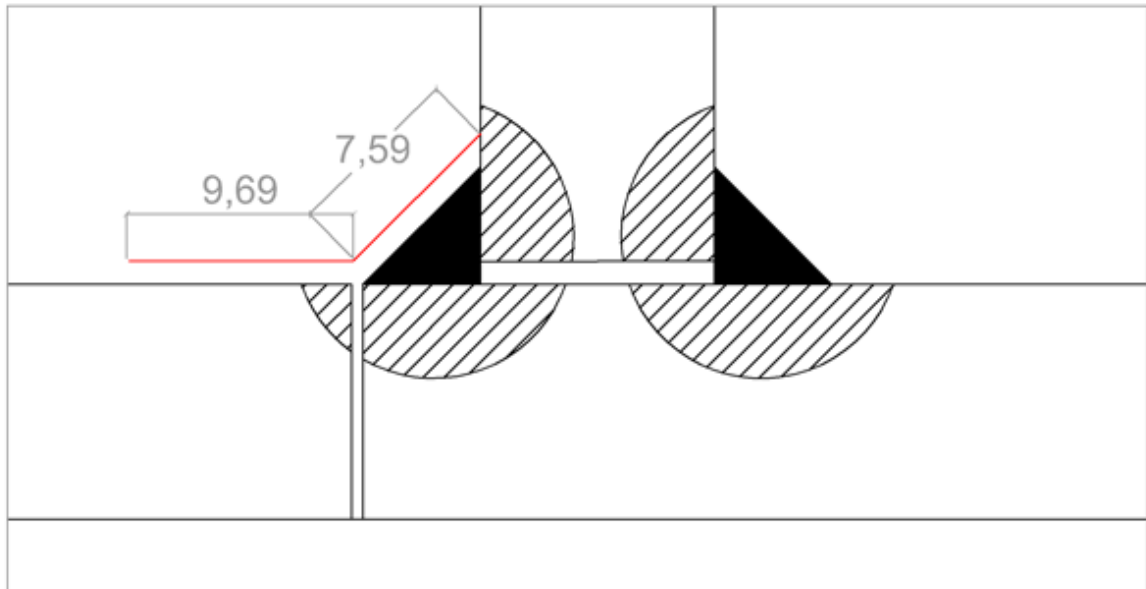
Detail drawing of the weld with the measurement path indicated in red
